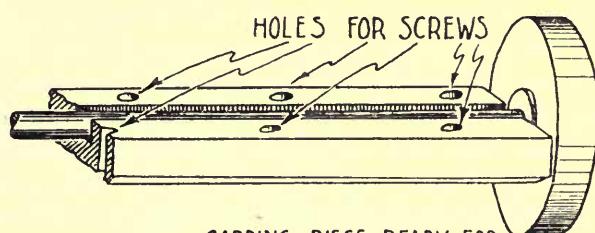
CAPPING PIECE READY FOR GLUING AND SCREWING TO BASE
